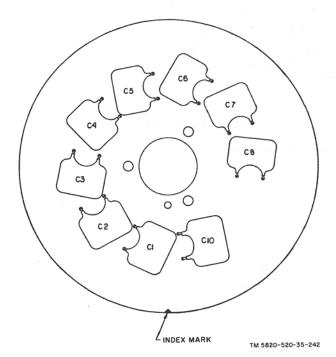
Rotor board assembly 1A12A34, parts location diagram.
